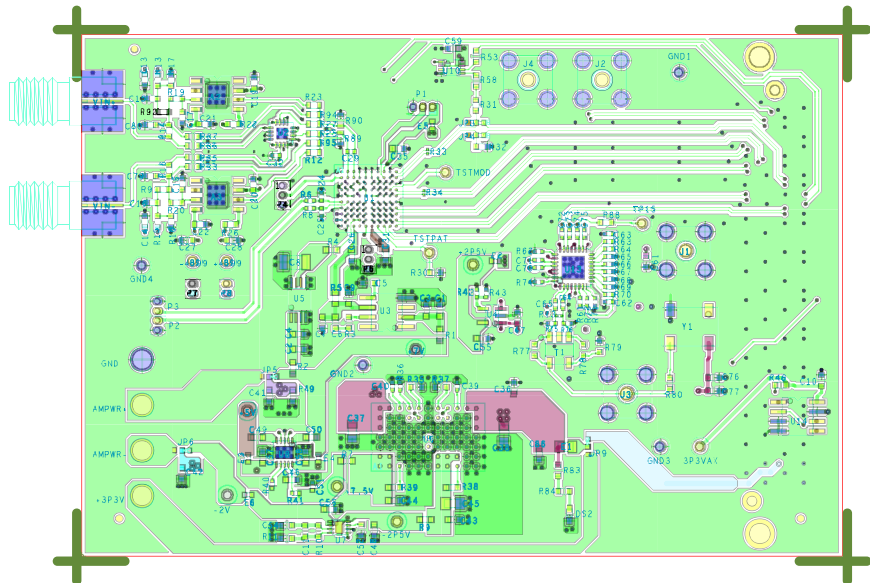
EVAL-ADAQ23875FMCZ Board Primary Layer, L1
